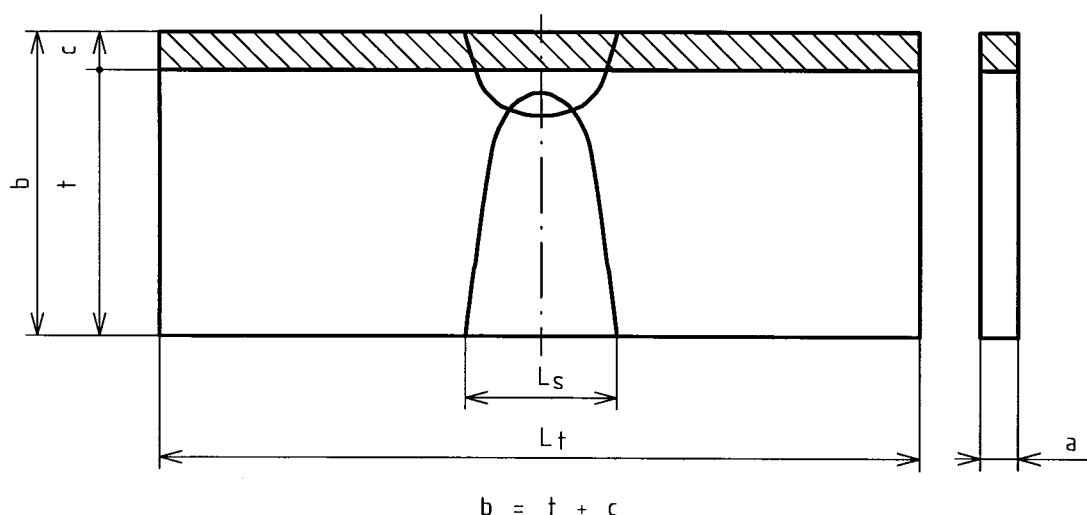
Side bend test specimen of cladding with a butt weld (SBCB)
